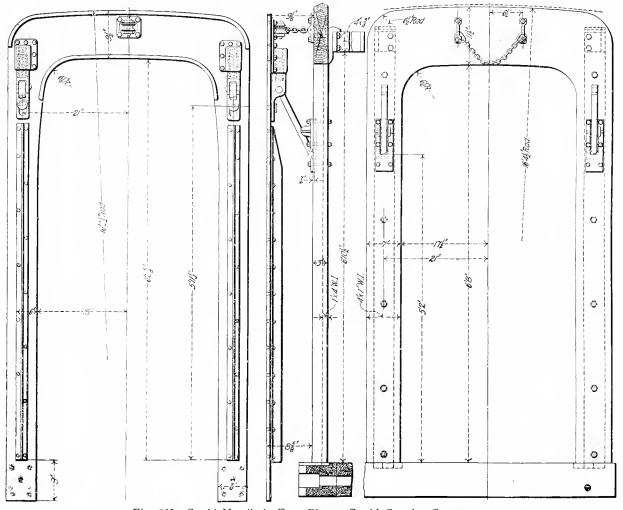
Gould Vestibule Face Plate. Gould Coupler Company.
